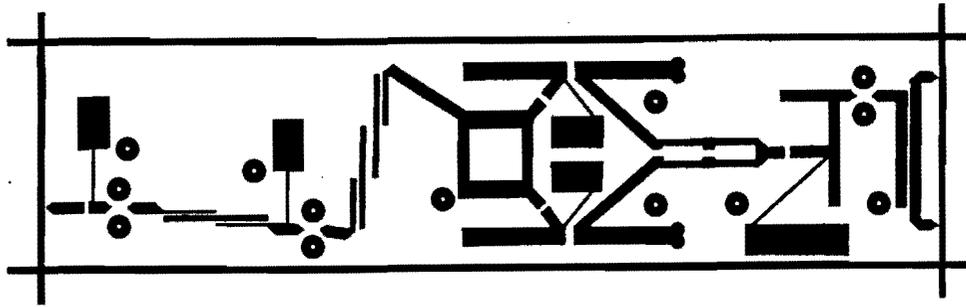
5760 MHz TX mixer PCB (0.8mm double-sided FR4).
